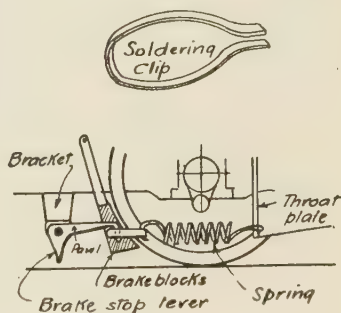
DETAILS OF AUTOMATIC BRAKE, AND SOLDERING CLIP.
